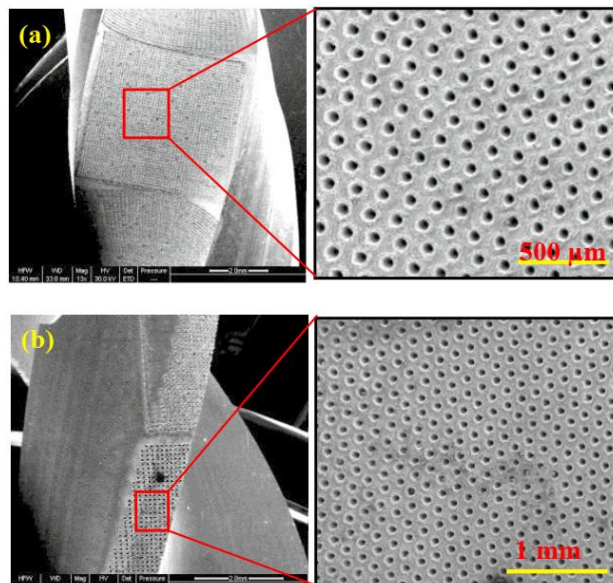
Micro textures at the (a) flute side and (b) margin side of a drilling tool [55]
